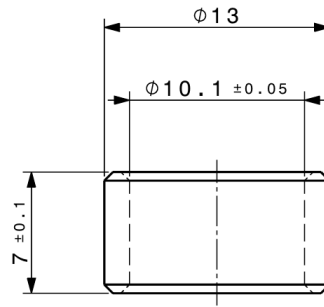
Bearing spacer component - Spacer 2 [4].
